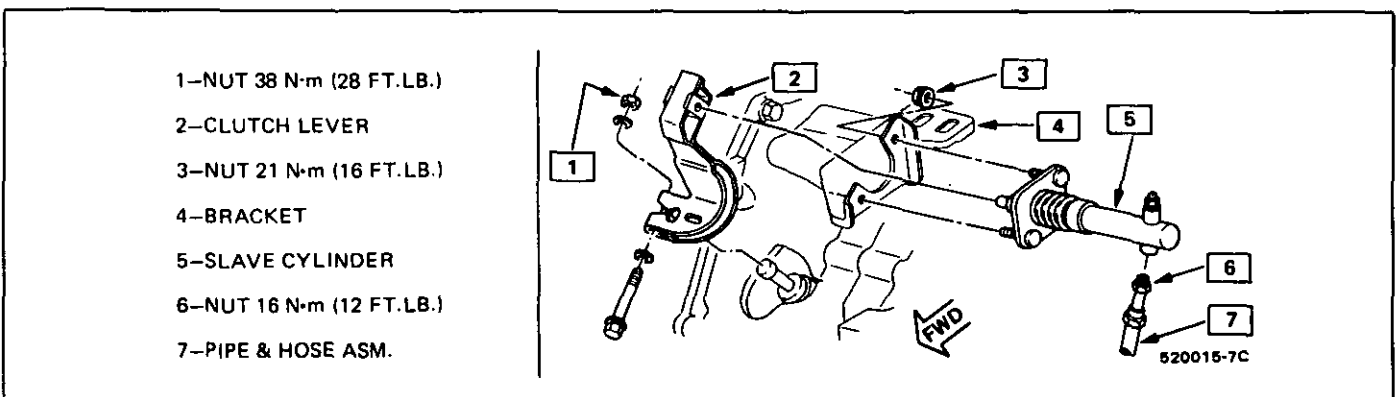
C-6 Clutch Slave Cylinder & Clutch Lever Mounting
